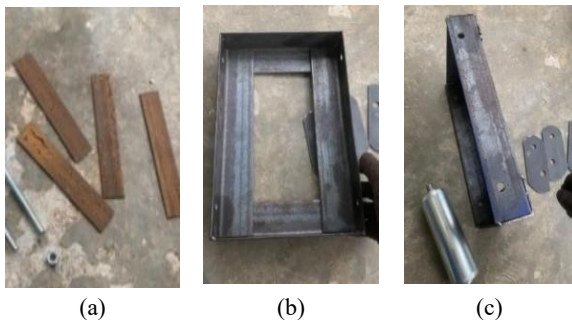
Fabrication body steps (a) by selection of steel, (b) join part and (c) drill a hole
